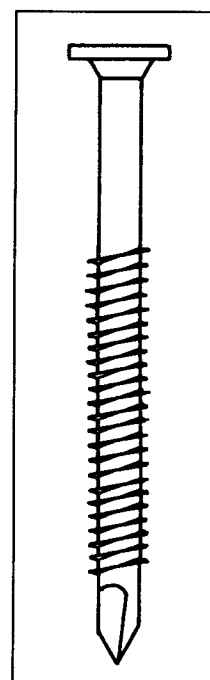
#14 diameter/14 threads per inch, reduced drill point fastener
